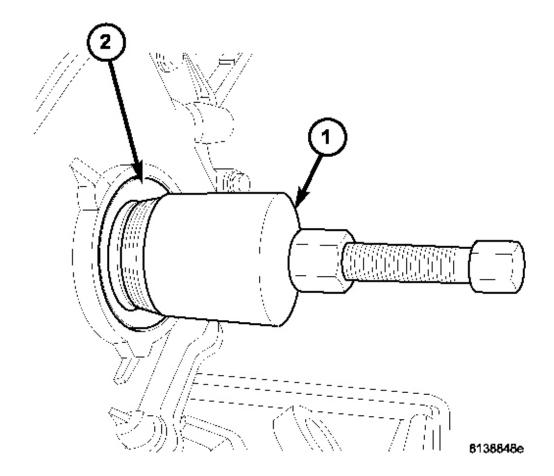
Crankshaft Damper Removal Courtesy of CHRYSLER LLC
